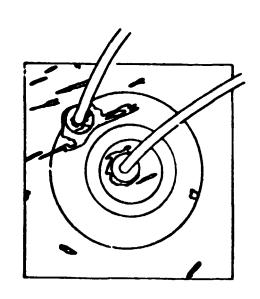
WELD SPLATTERED ON DIE.
